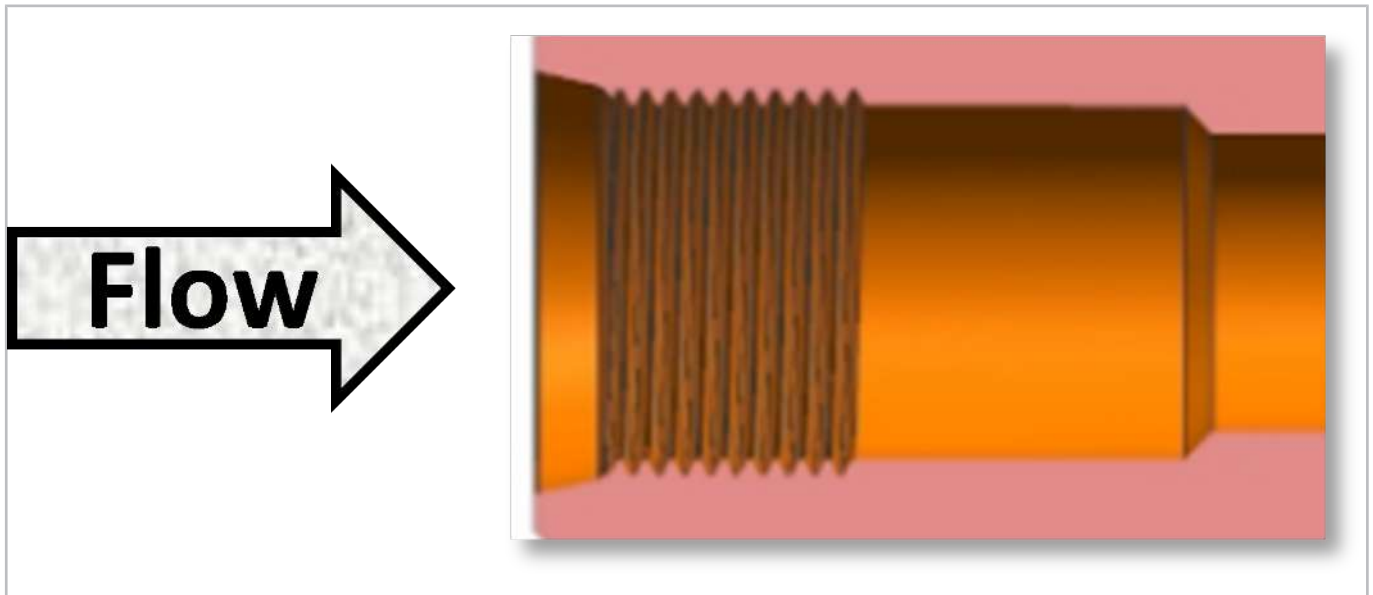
Cut-away view of the ECO port with corresponding flow direction on the GED6 and GED8 series of scroll compressors
